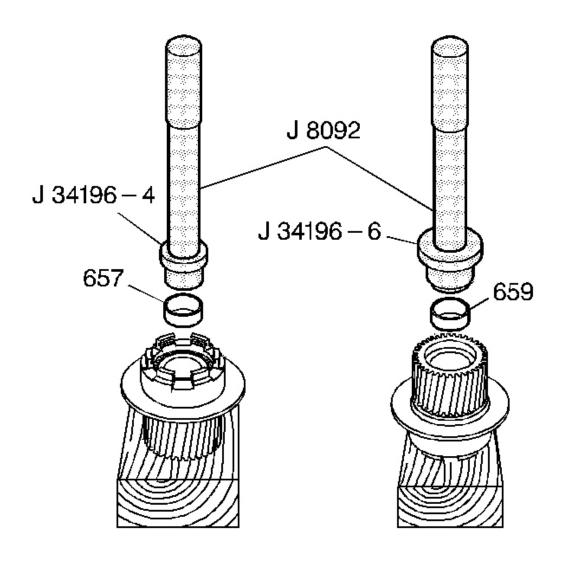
View Of Input Sun Gear Front Bushing & Special Tools Courtesy of GENERAL MOTORS CORP.
